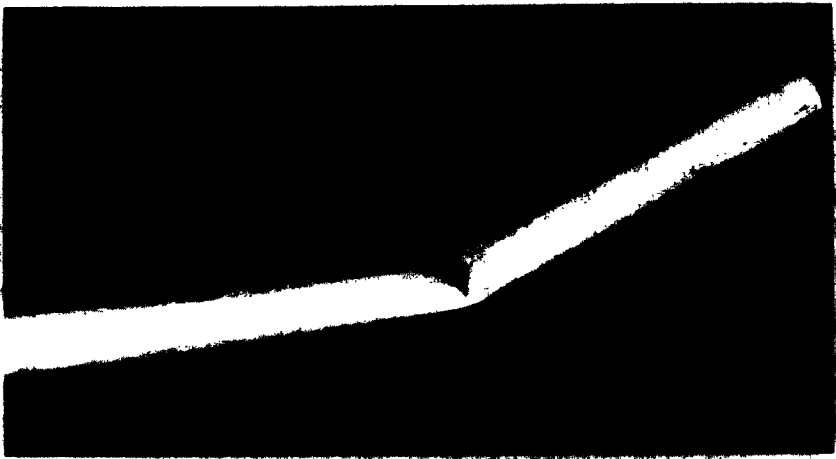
Tube buckled under pure bending ($D/t = 34.71$, Al-6061-T6).
